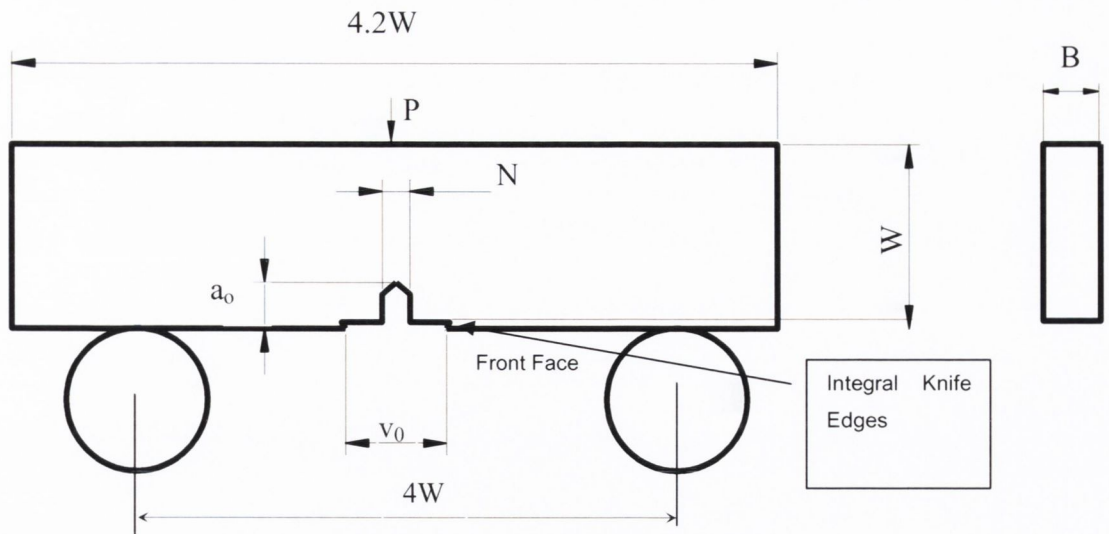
Basic outline of a SENB type specimen sitting on rollers.
